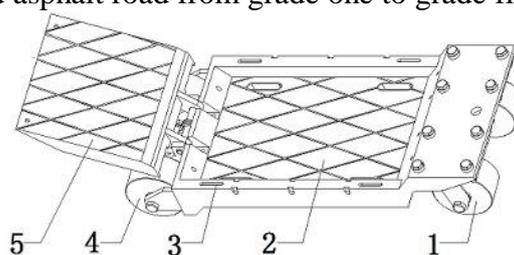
schematic diagram of emergency spare wheel structure universal wheel 2. Vehicle body 3. Fixing hole of tensioner 4. Directional wheel 5. Automobile guide plate.
